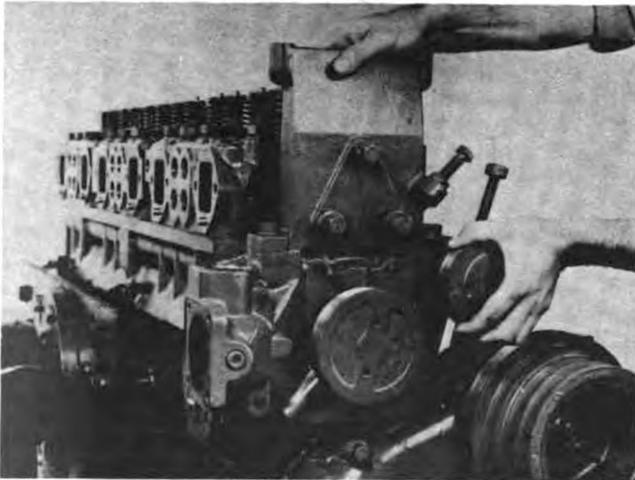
(N114271). Install The Water Pump And Idler Pulley.
